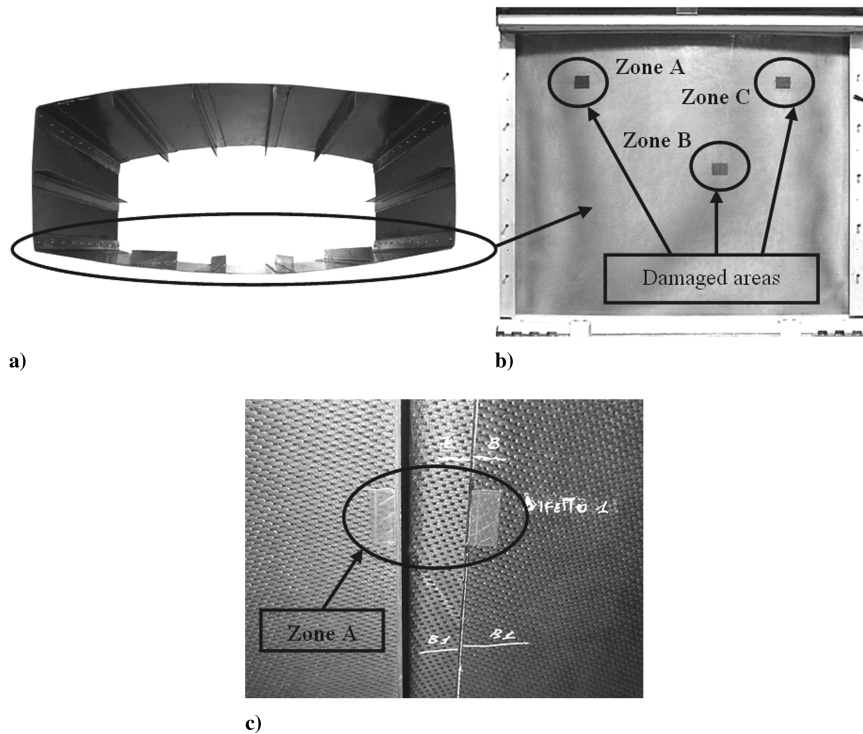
Closed box: a) top view, b) predamage location, and c) inner view of one Teflon insert.
